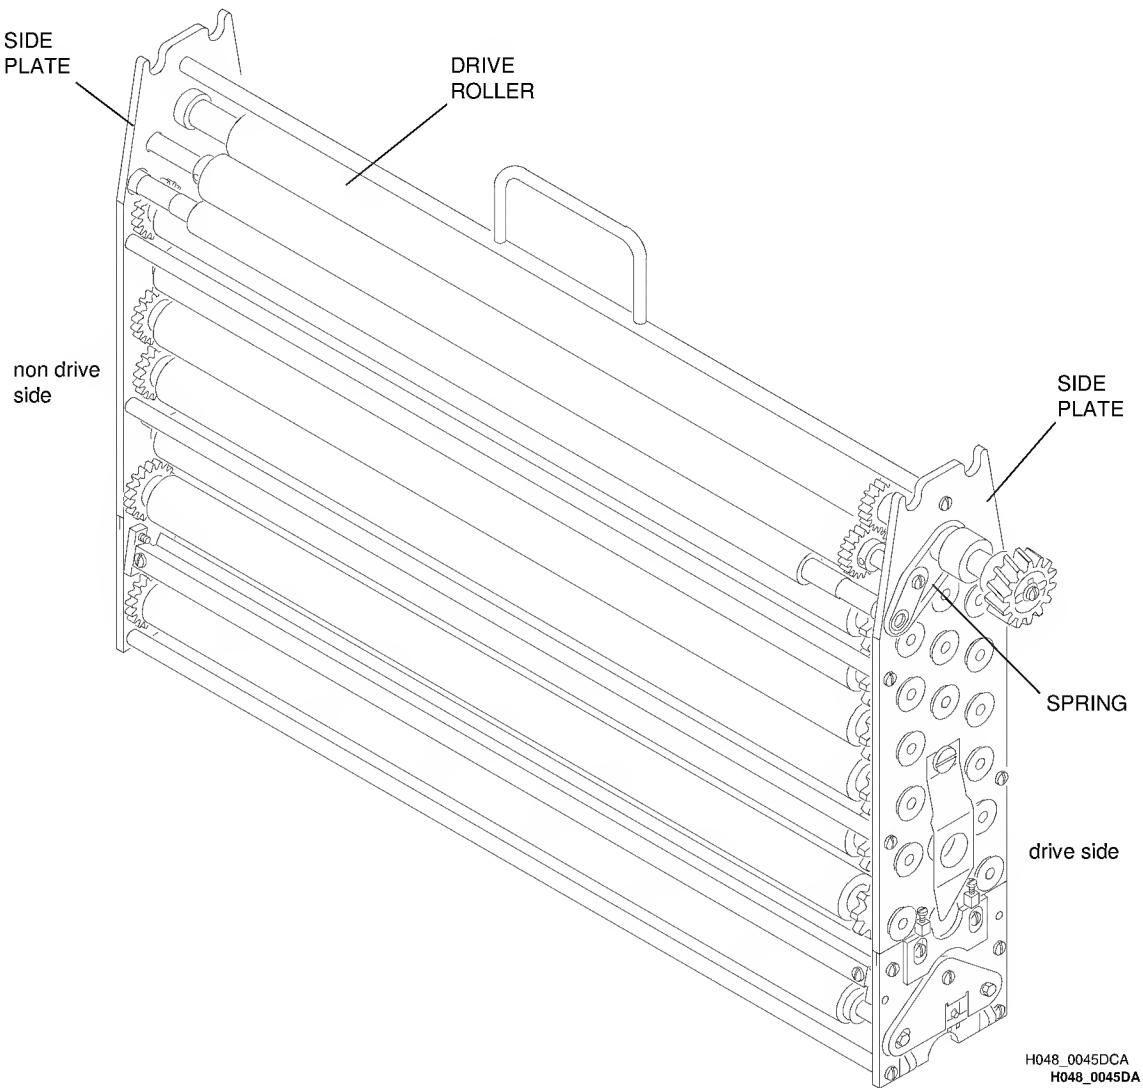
Removing the Resilient G Roller from the Developer or Fixer Rack
